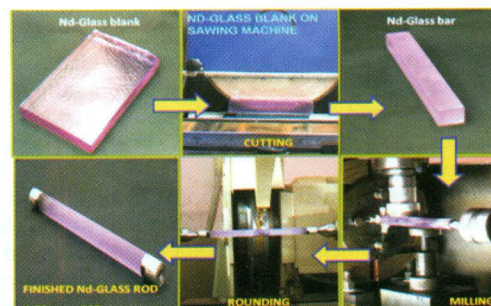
Optical machining of laser glass at RRCAT from slab to laser rod.
